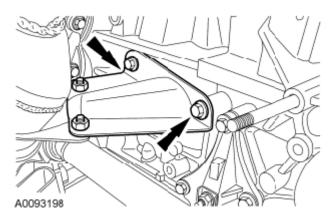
Locating Catalytic Converter Support Bracket And Bolt Courtesy of FORD MOTOR CO.
